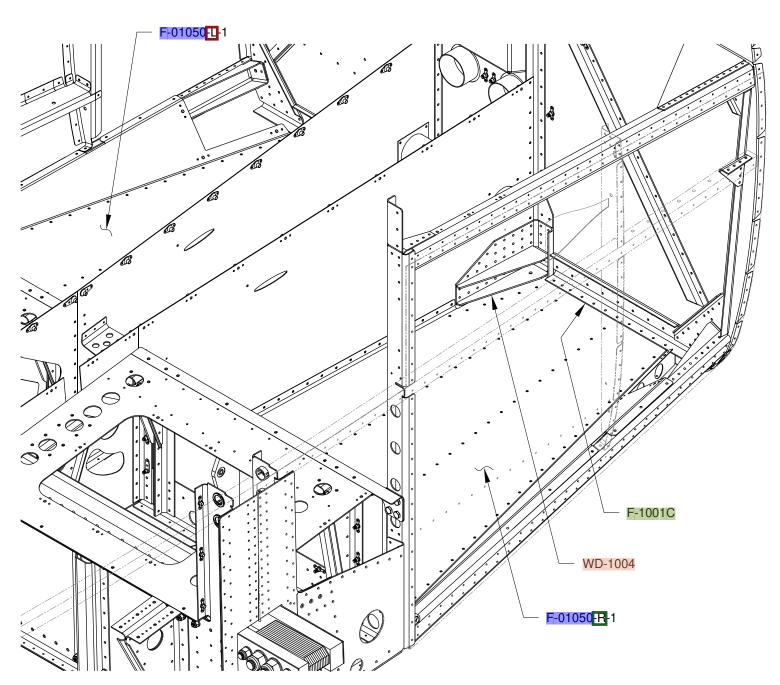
FWD CABIN FLOOR PANEL INSTALLATION
